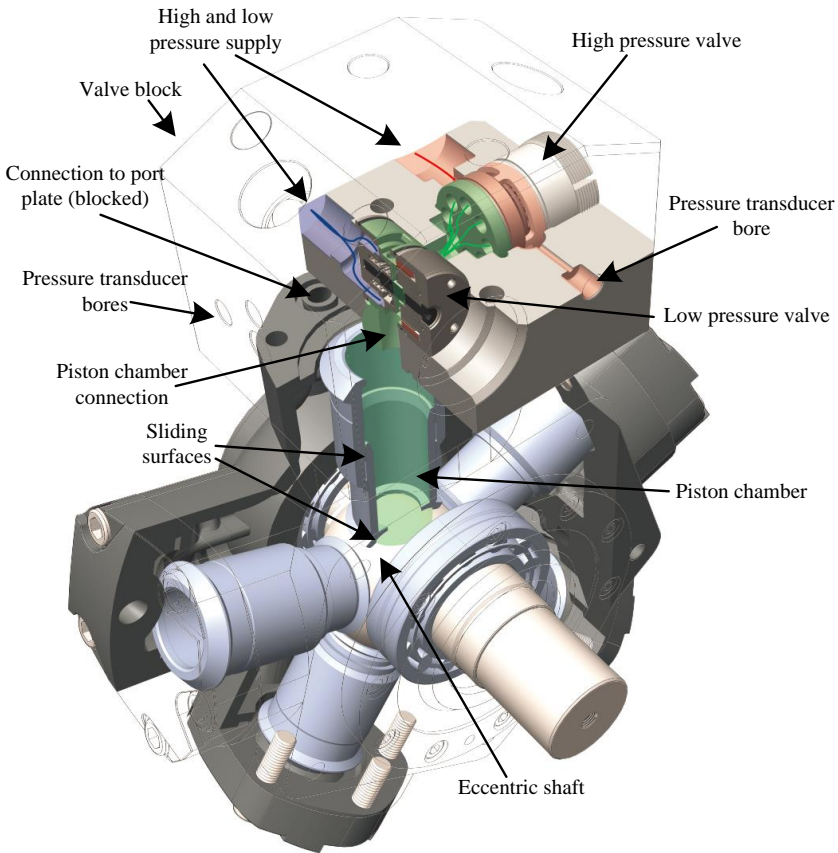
"CAD model showing the modified machine and the custom valve block equipped with the MCA and MMA PT valves". This figure is also published in Paper H.
